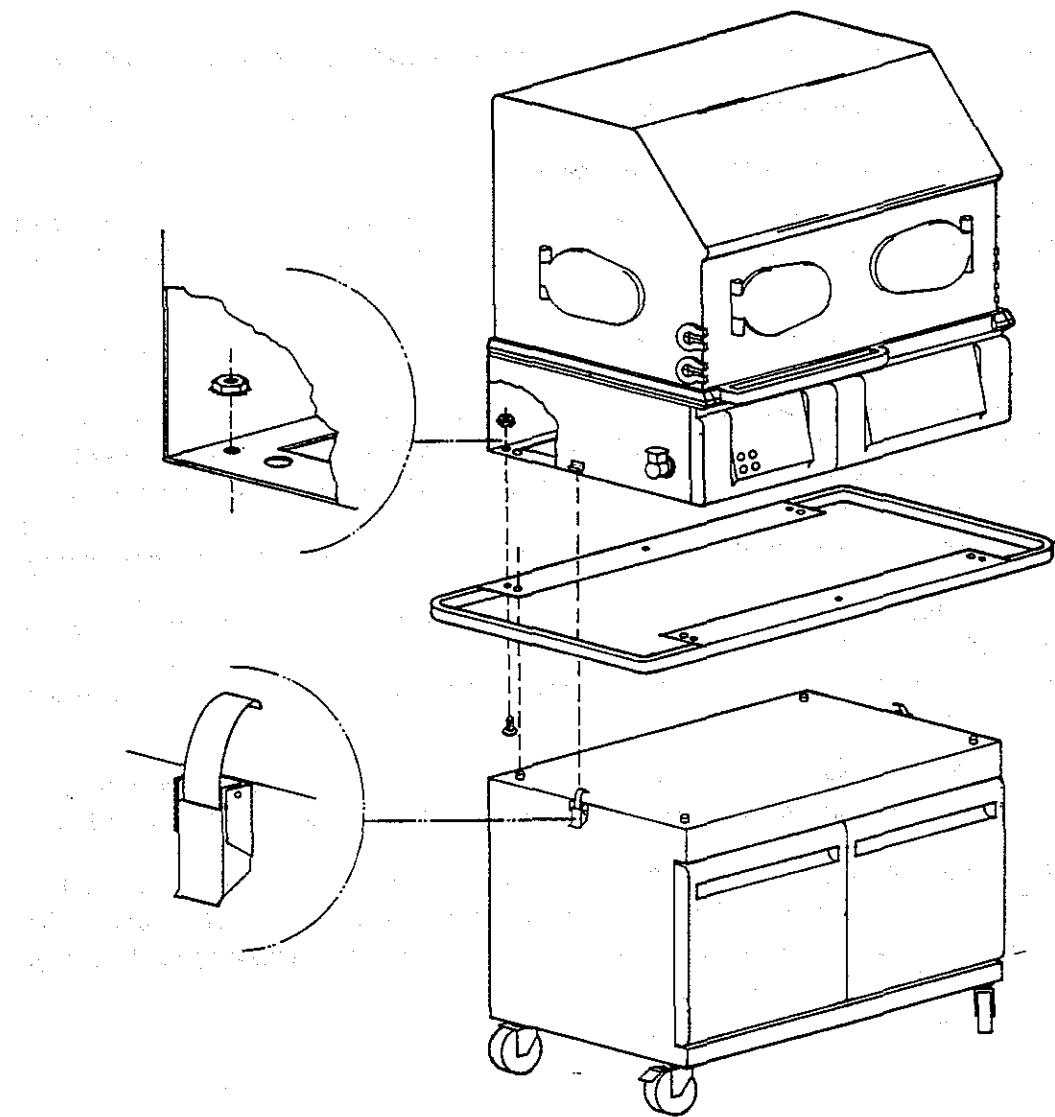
ASSEMBLY, INCUBATOR MOUNTED ON A STANDARD CABINET STAND
